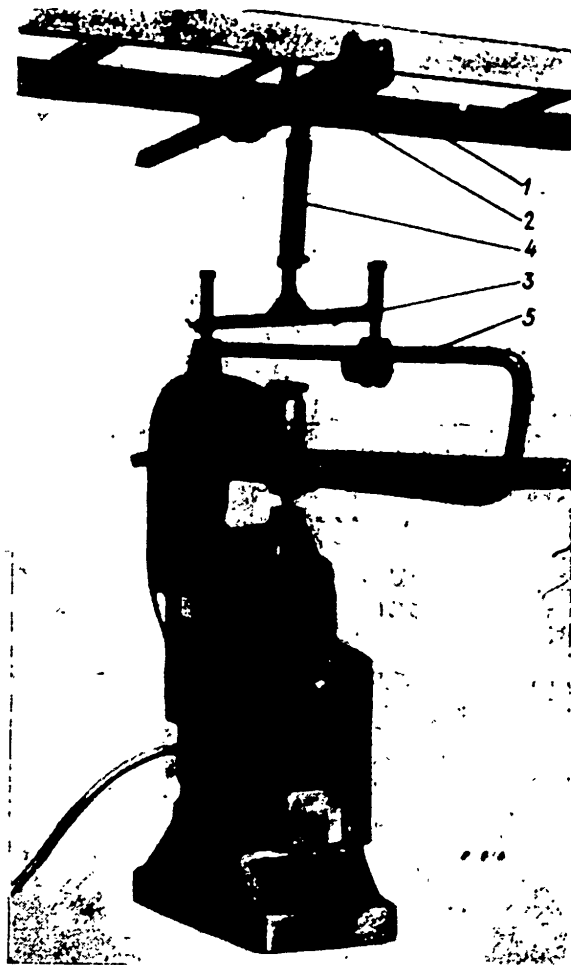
Riveting a Panel on the Press KP-503 by Means of Conveying and Aligning Equipment with Turning Frame
